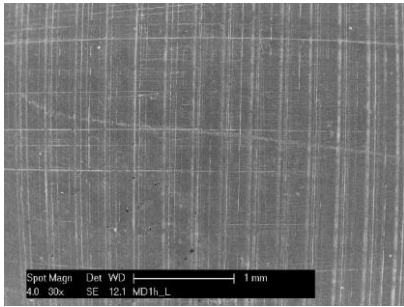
Surface condition of machined test samples; sample W1A [Havlik 2012]
